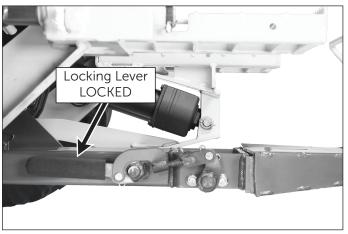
H19 Locking Lever in "LOCKED" Position
